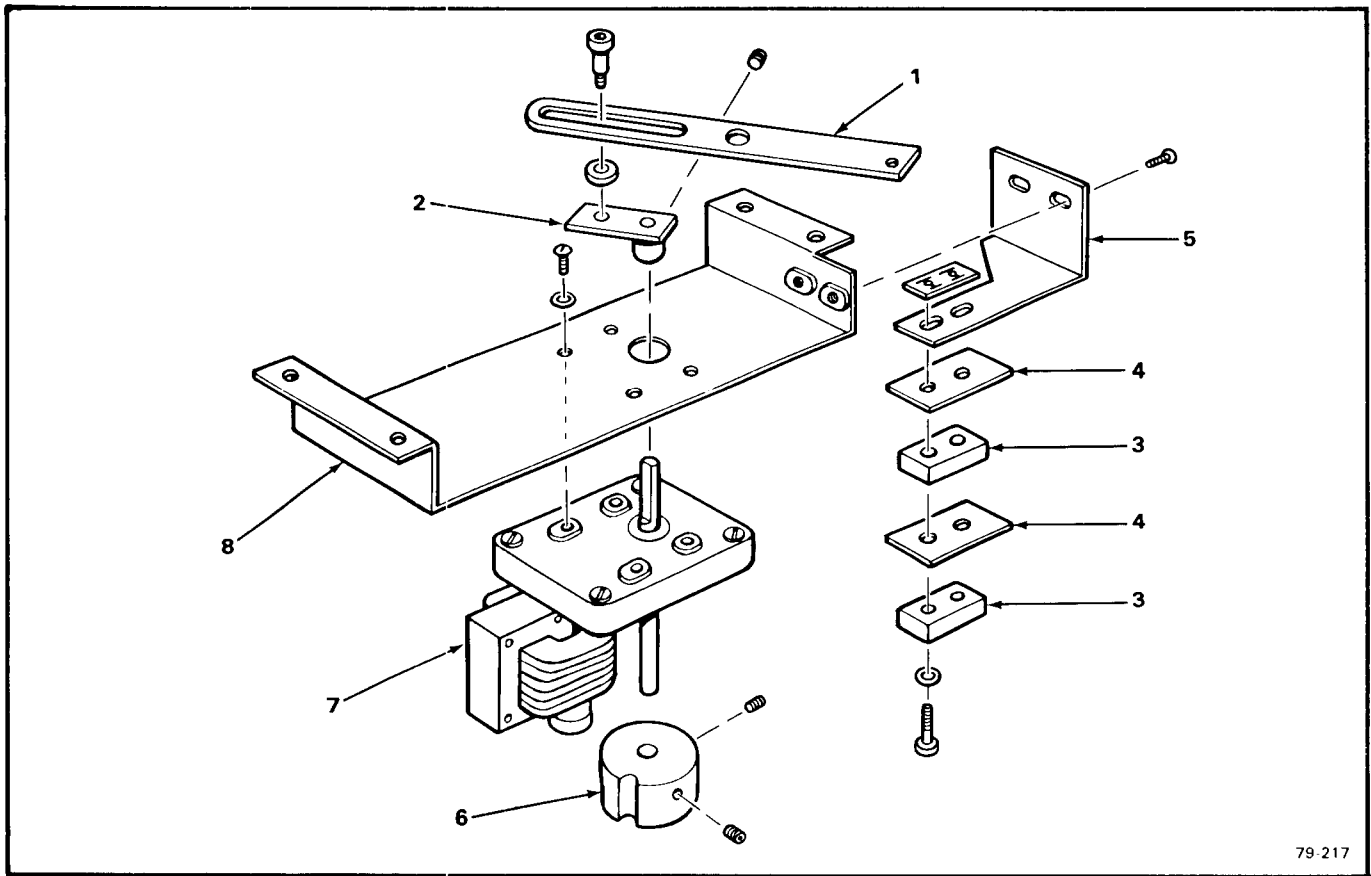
Ice Breaker, Agitator, Cylindrical Bin Assembly
